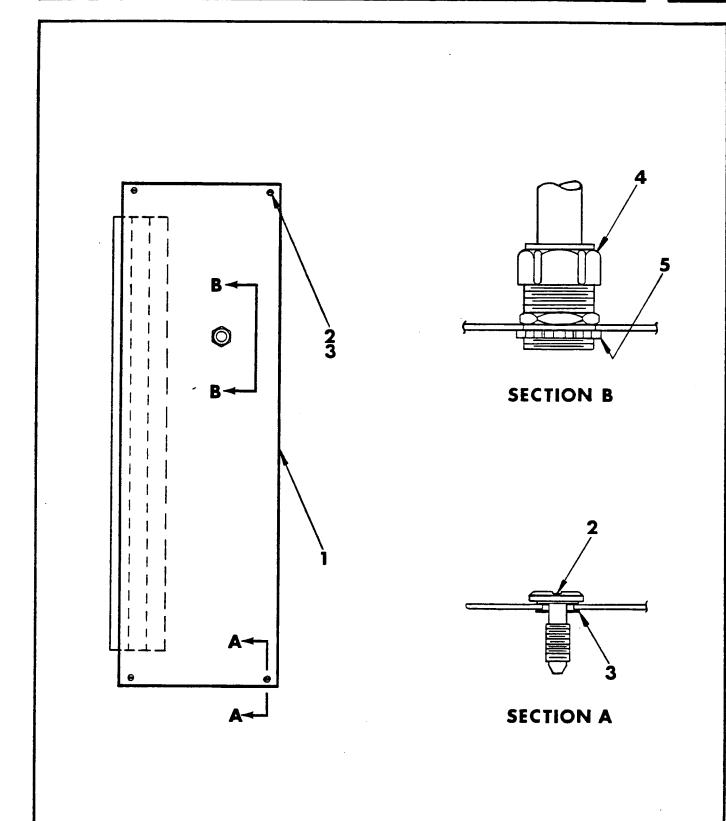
DRIVE GEAR COVER ASSEMBLY
